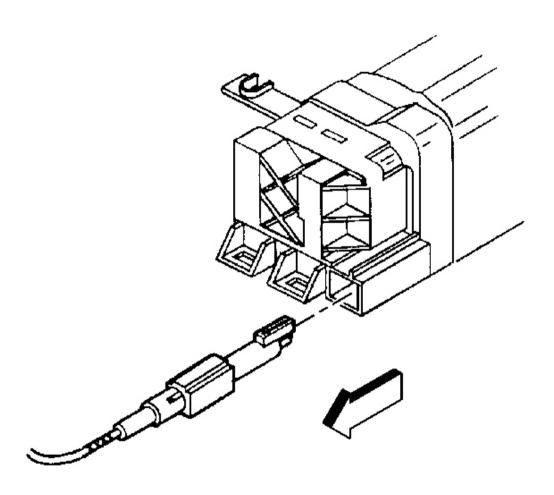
Park/Lock Cable & Ignition Switch Courtesy of GENERAL MOTORS CORP.
